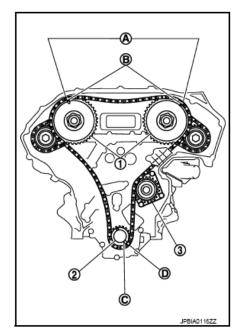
Identifying Timing Chain, Water Pump, Crankshaft Sprocket & Camshaft Sprocket With Links Courtesy of NISSAN NORTH AMERICA, INC.
